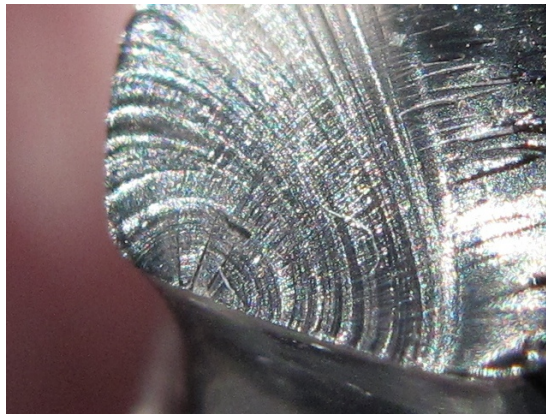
Fatigue fracture of plastic (ref. [32])
